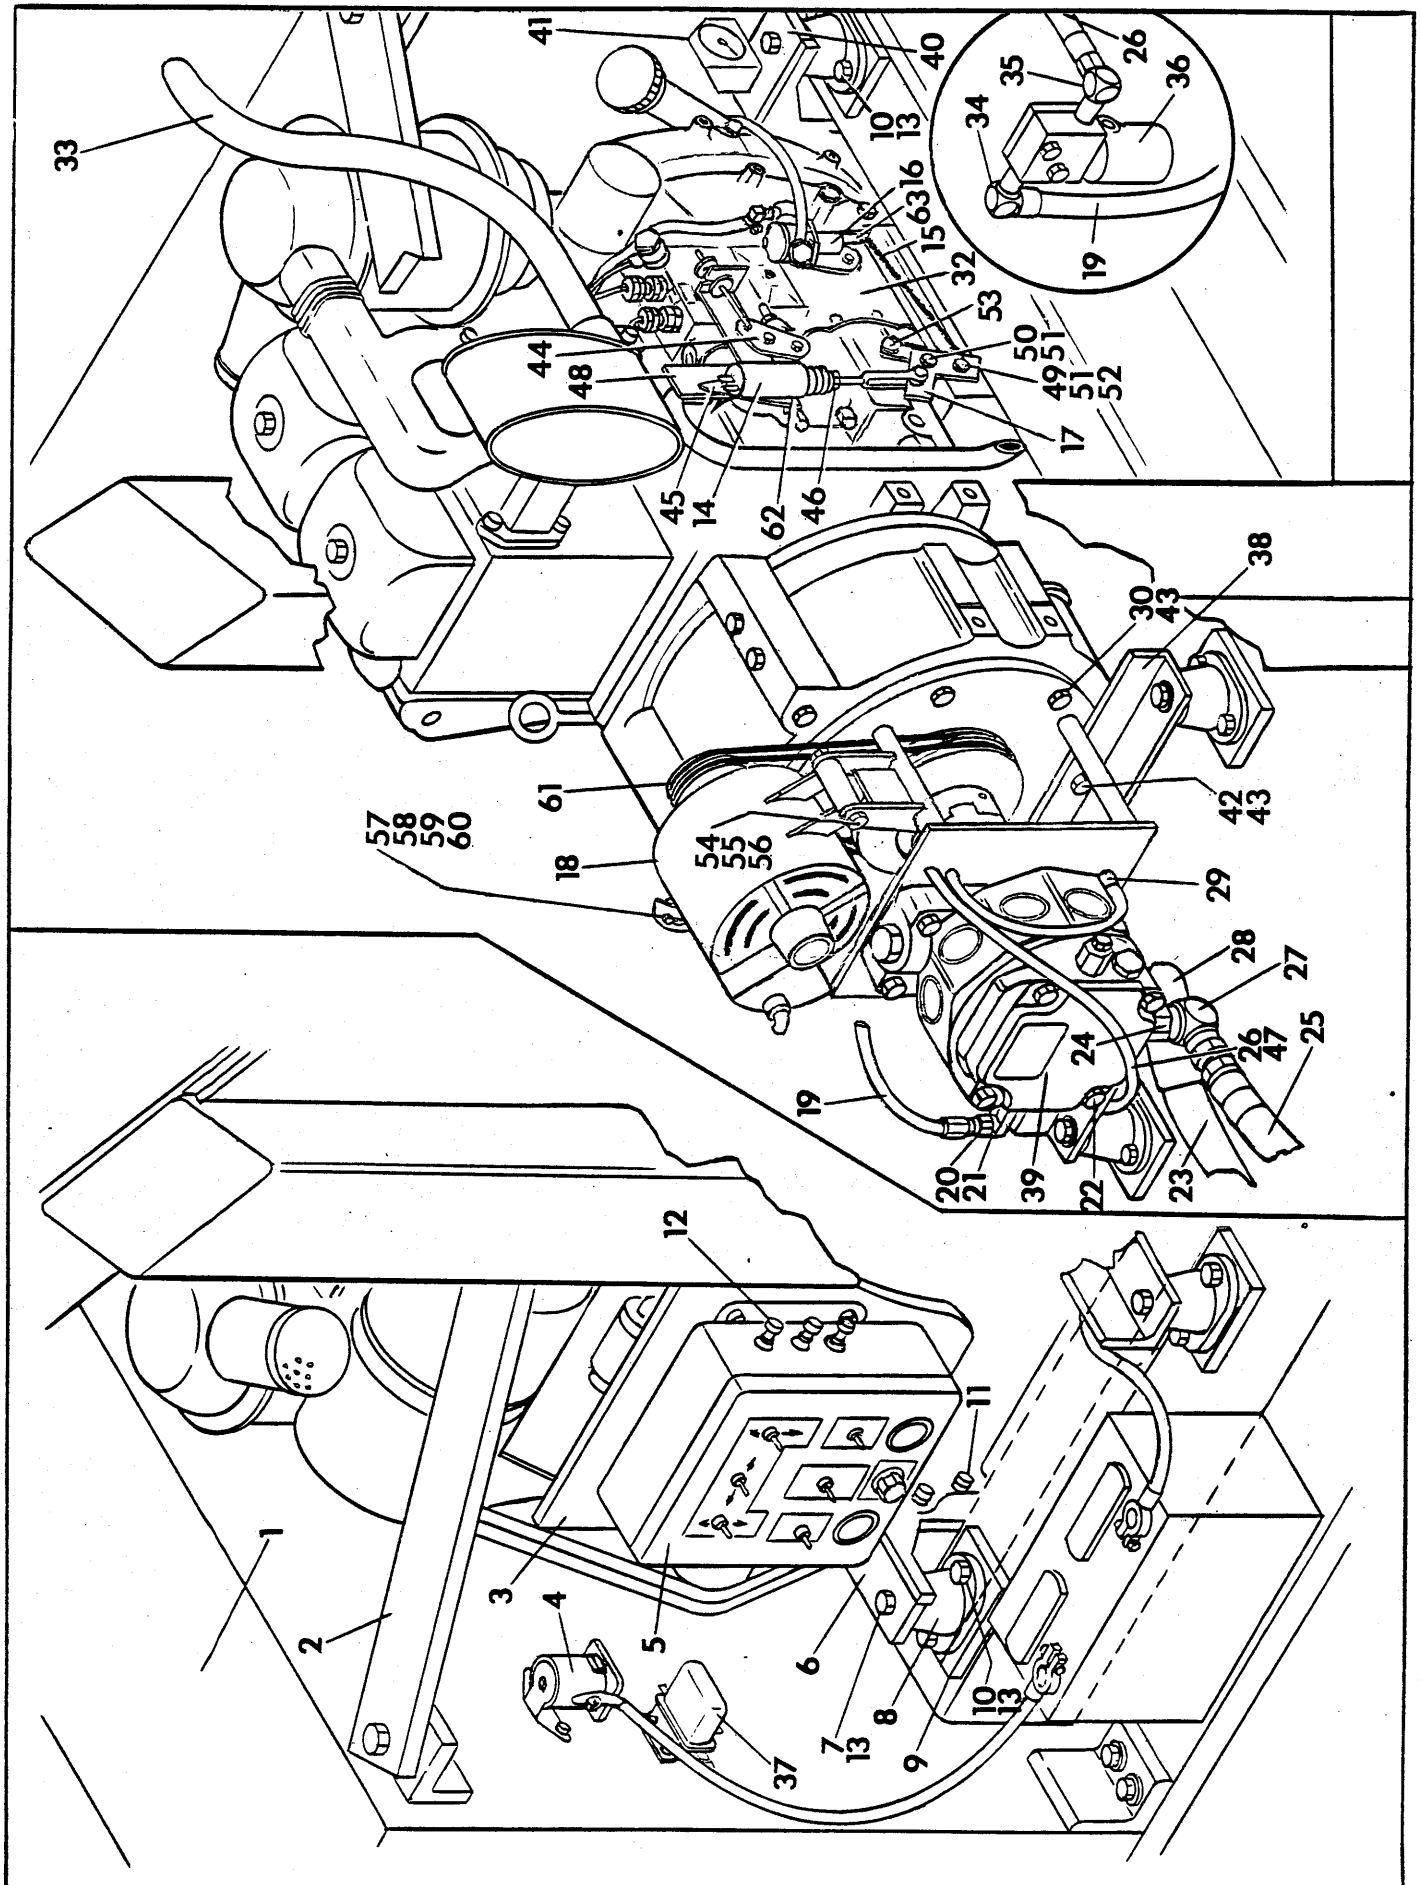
DIESEL ENGINE ASSEMBLY (OPTION 21066)
